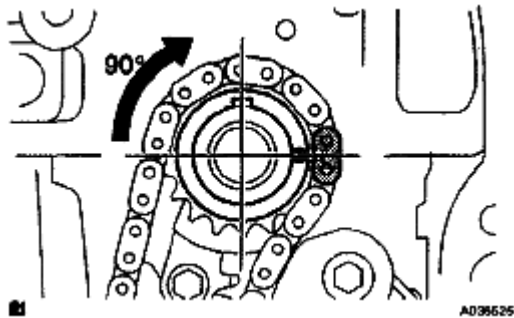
View Of Rotating Crankshaft Clockwise 90°.
